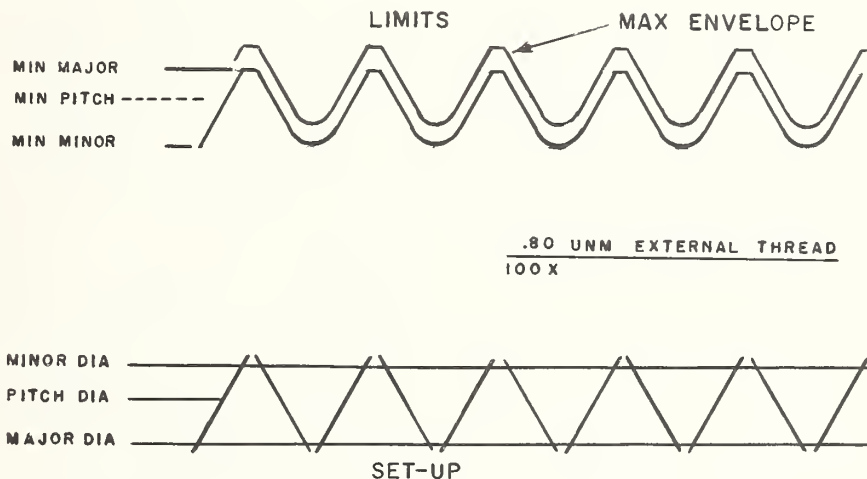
Suggested chart for projection inspection of external Unified Miniature threads.
